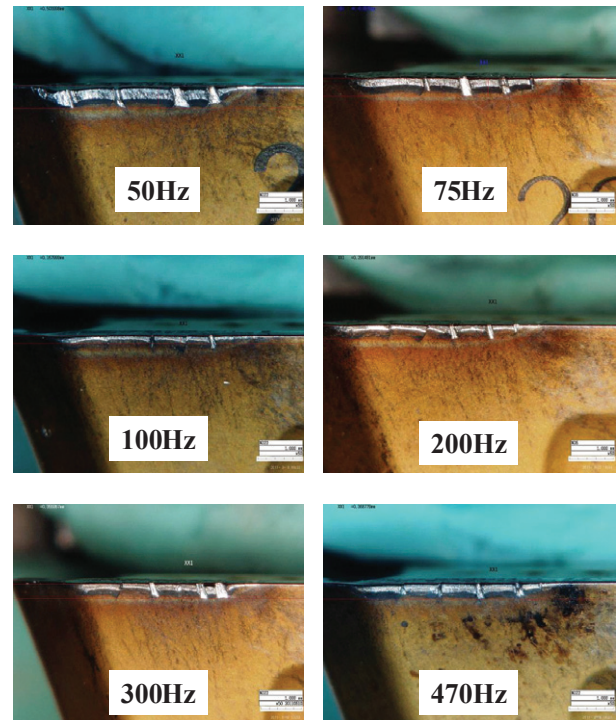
Flank faces of the tools after milling with a various bandwidth.
